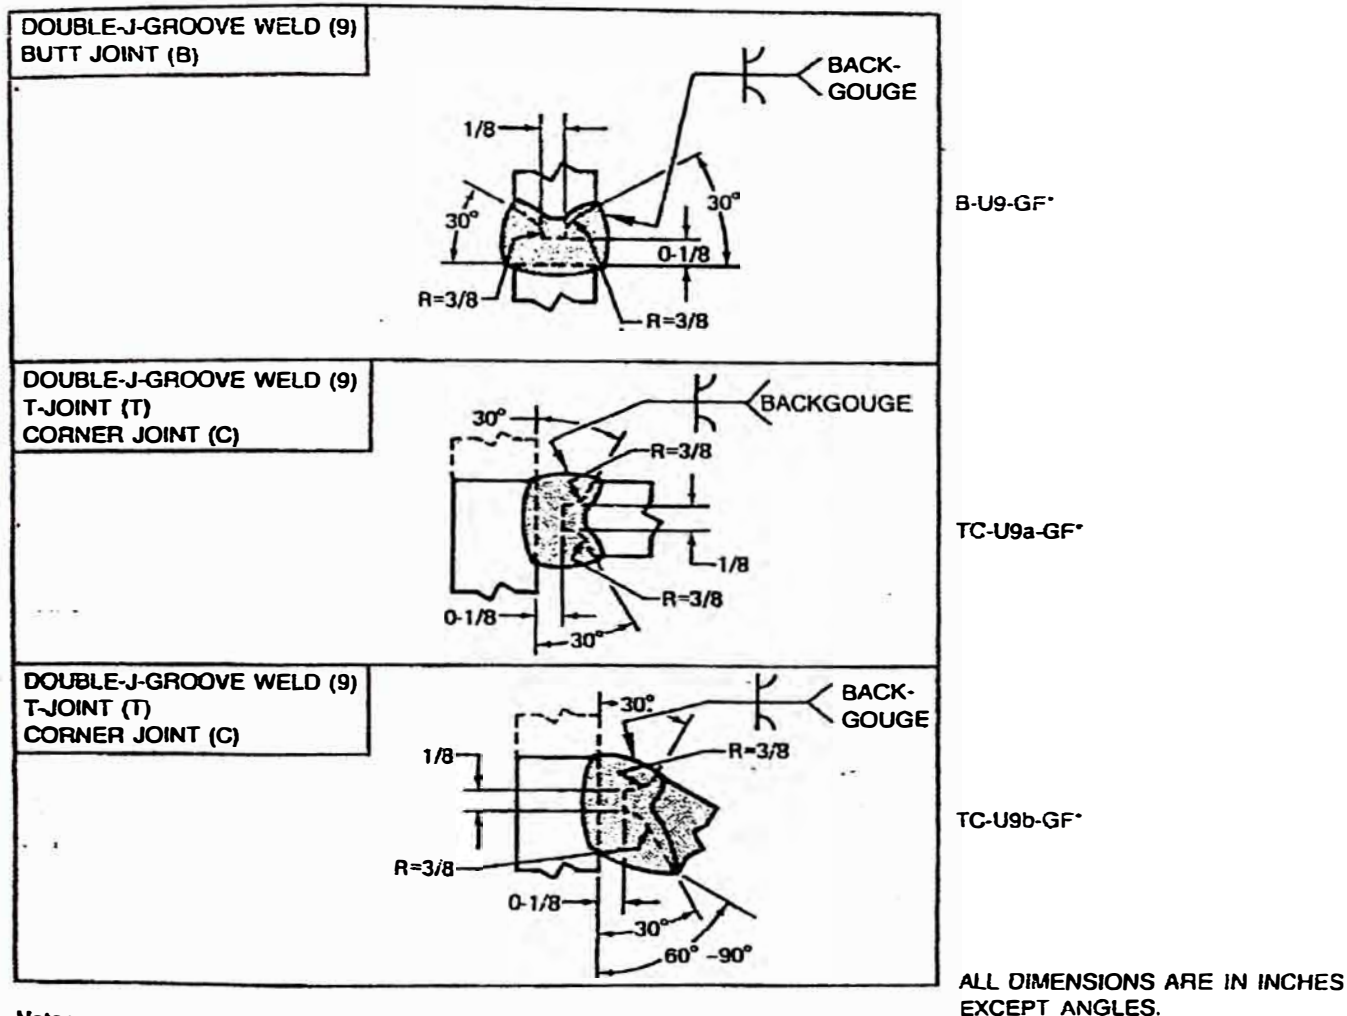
(Cont'd)—Complete Joint Penetration Prequalified Gas Metal and Flux Cored Arc Welded Joints
